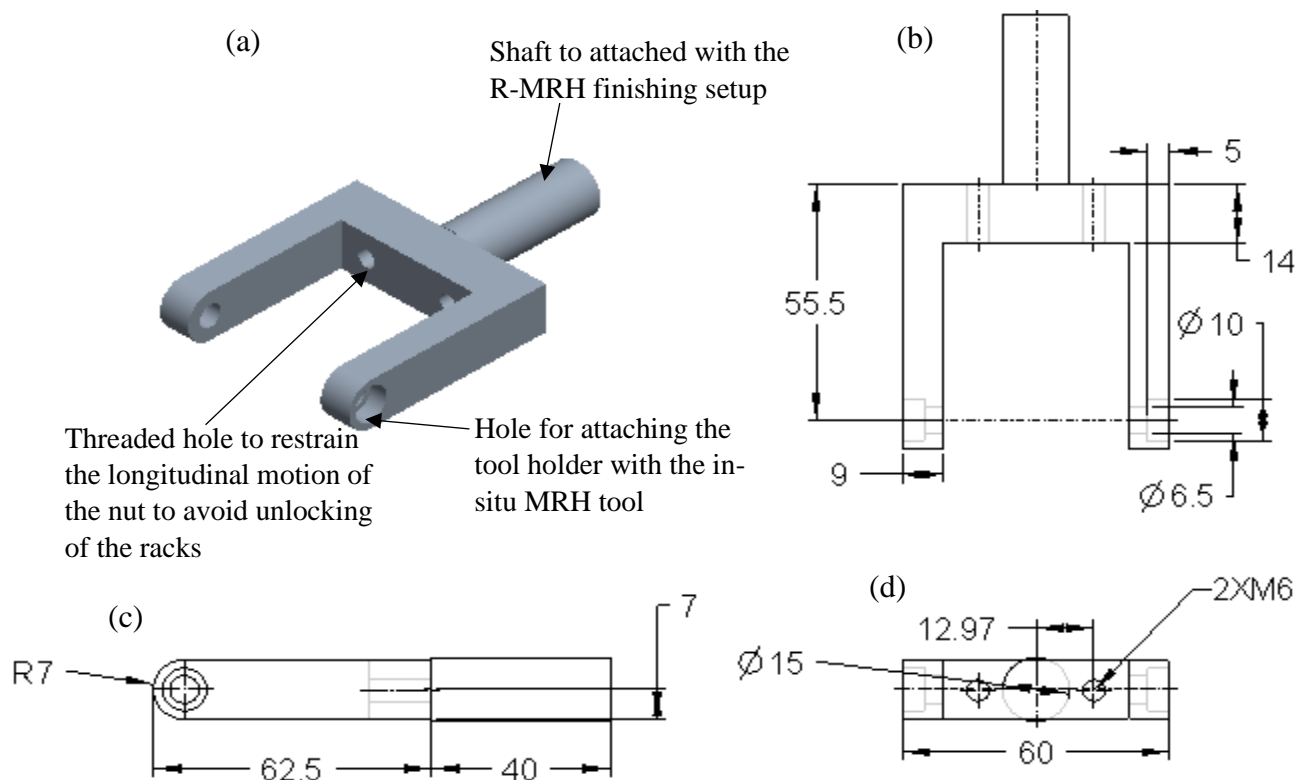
(a) 3-D view, (b) top view, (c) side view, and (d) front view of the CAD model of tool holder.
